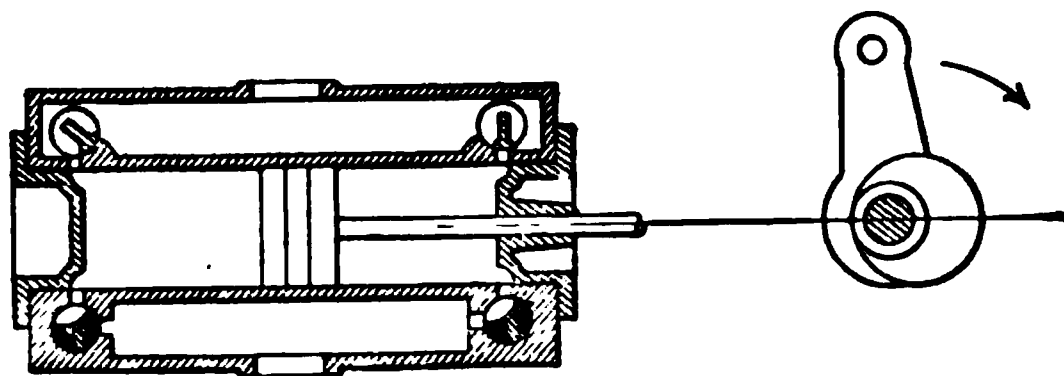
Section of Corliss Engine, showing valves in position for admitting steam at the left.
